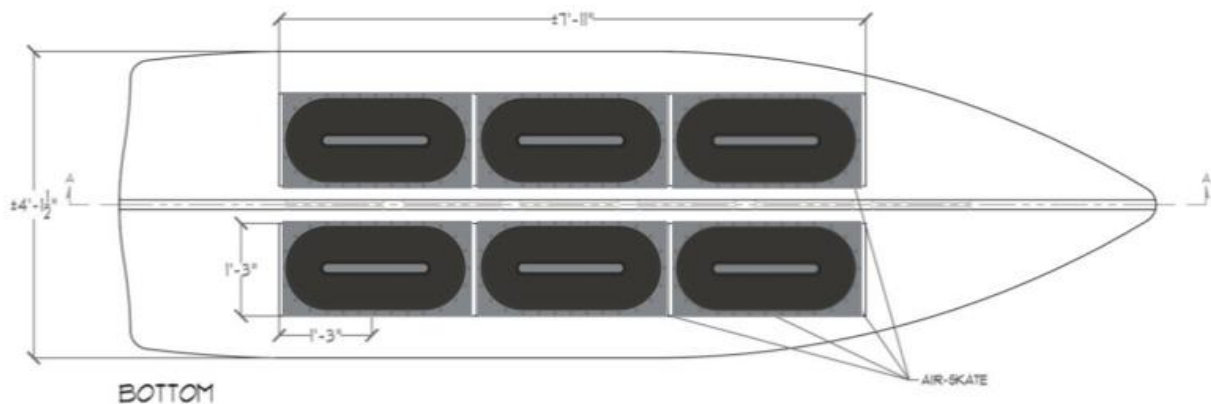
E: Sketch of possible pod bottom view. Shown are the oval shaped skates for reference.
